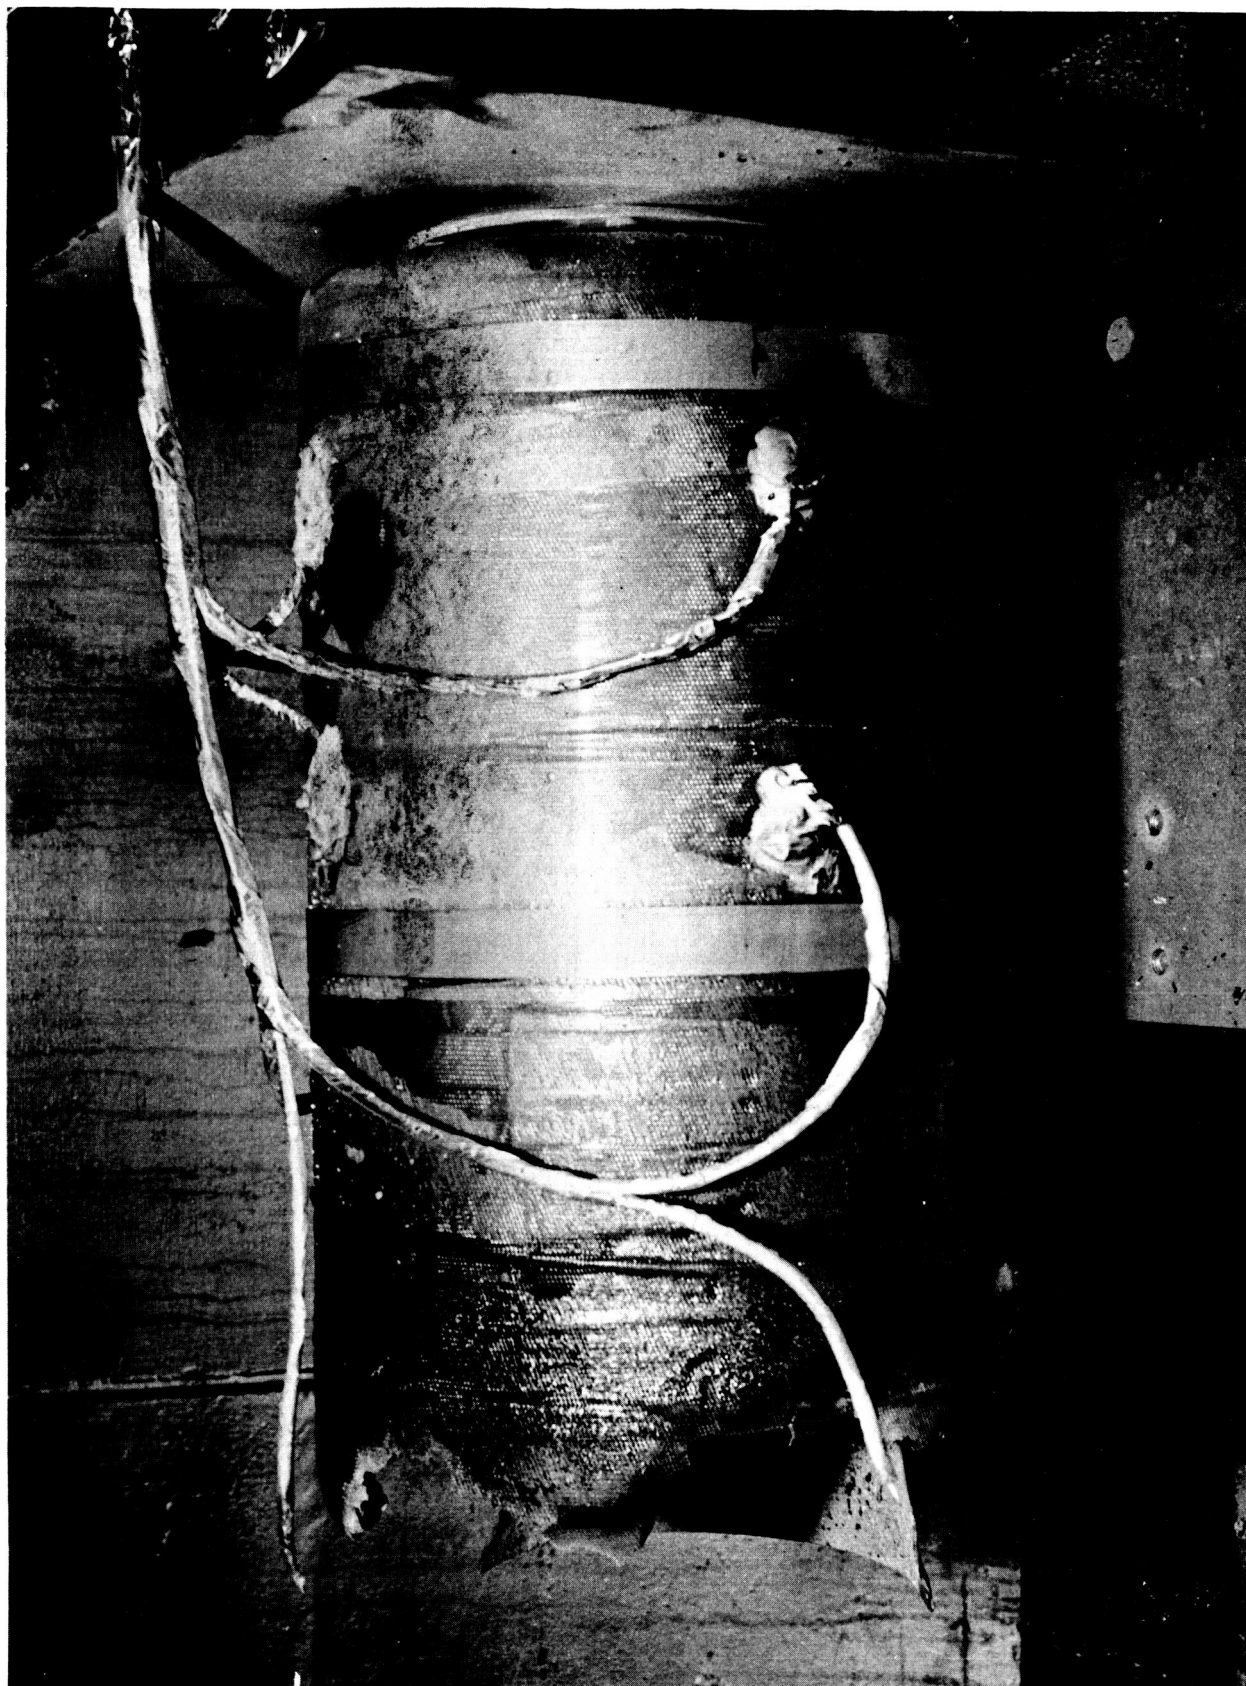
Engine Assembly S/N 2 After Fire Test
